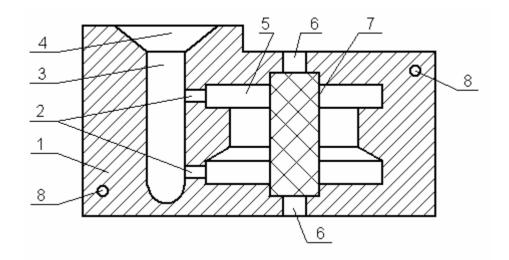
Metal mould with vertical split and sand core: 1 – mould left half; 2 – feeders; 3 – pouring gate; 4 – pouring basin; 5 – mould cavity; 6 – venting channel; 7 – sand core; 8 – centering holes
